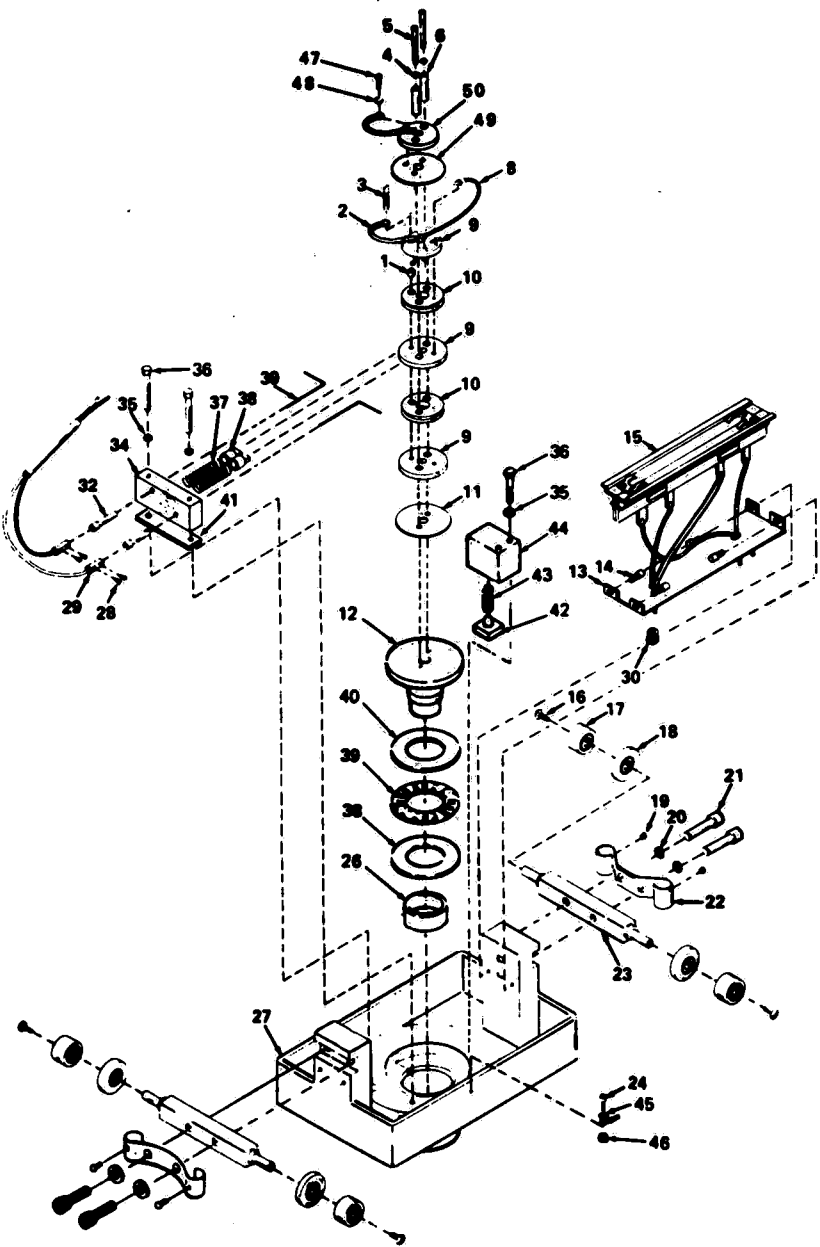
E. LOW CEILING CARRIAGE ASSEMBLY, Units Shipped After 7/82.
